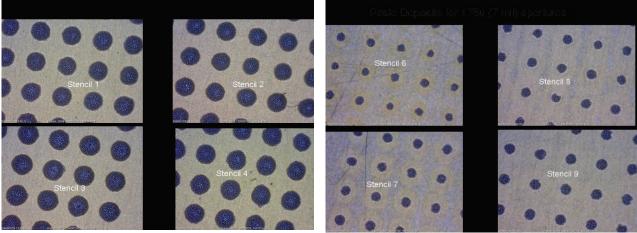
Solder Bricks: 5 mil stencil, 12 mil aperture
